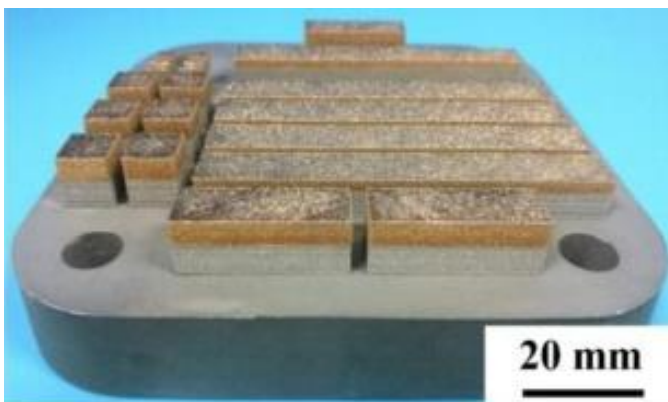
316L stainless steel/Cu10Sn multi-metal parts formed by L-PBF [149].
